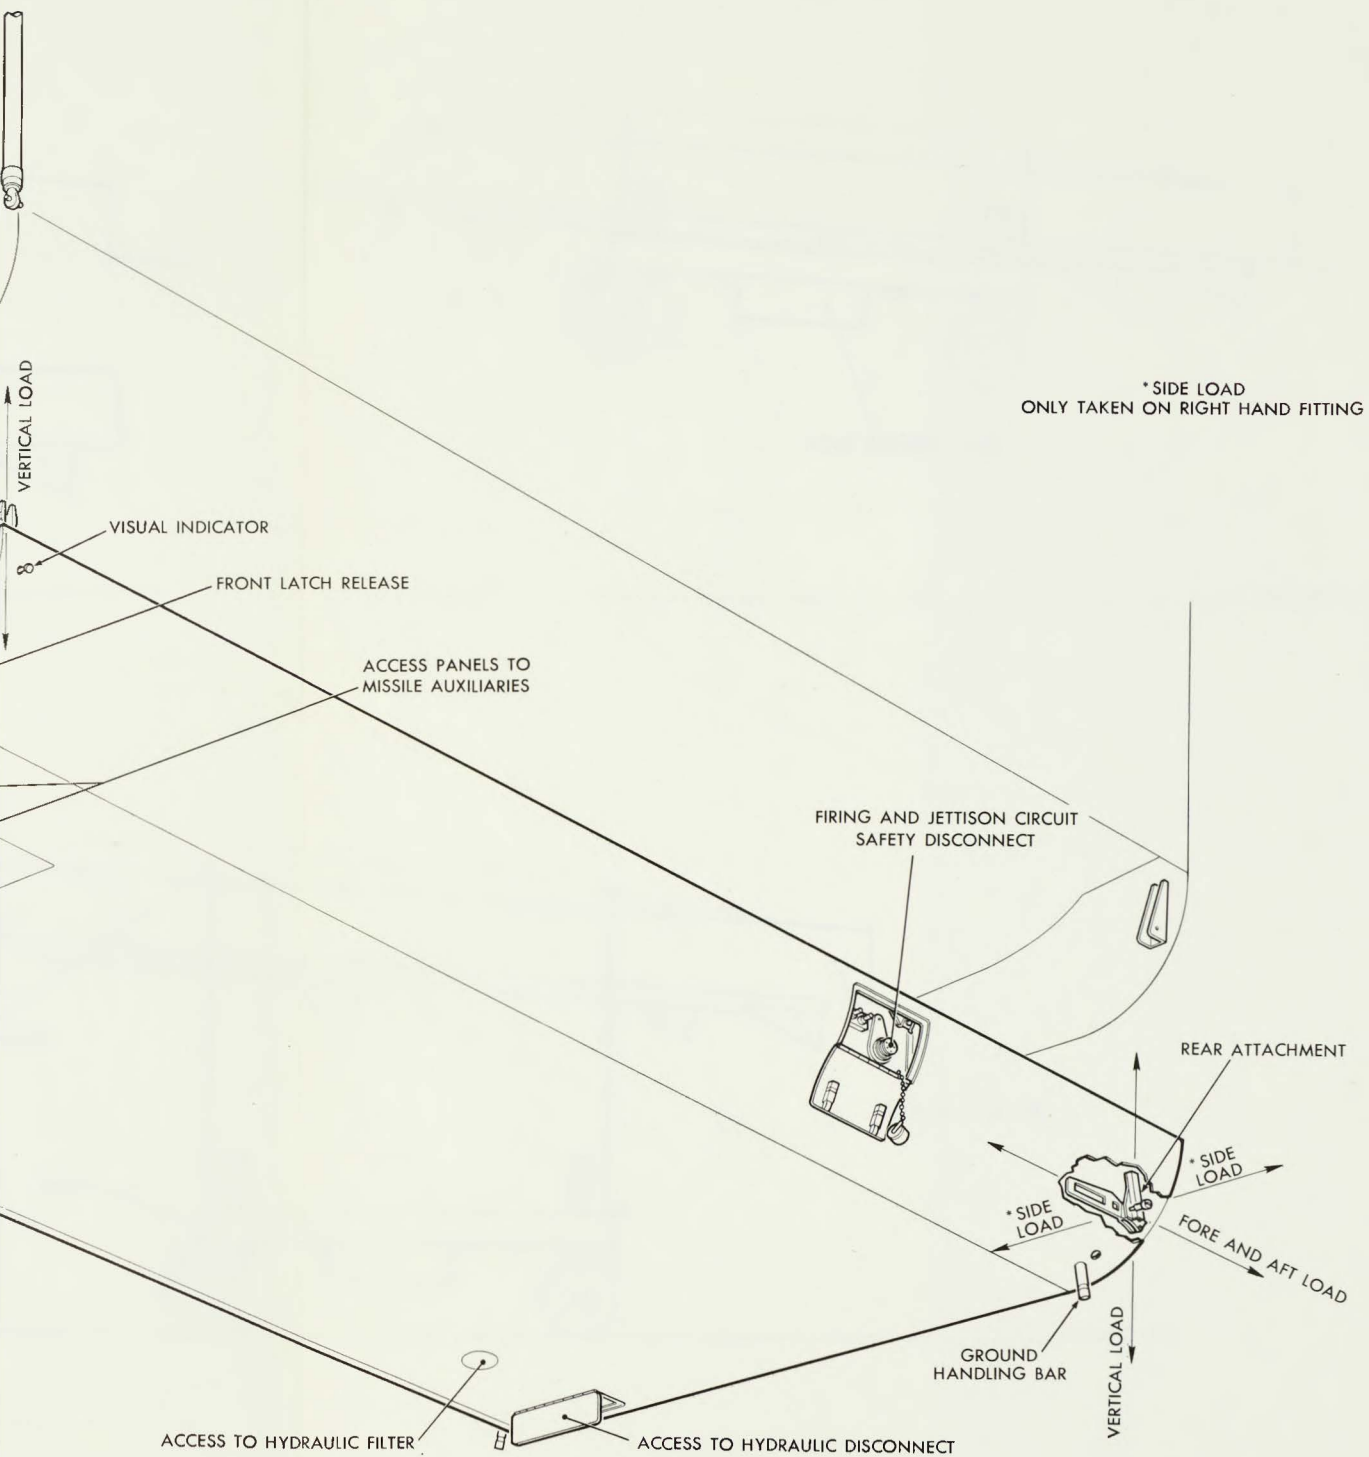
WEAPON PACKAGE - ACCESS DOORS
